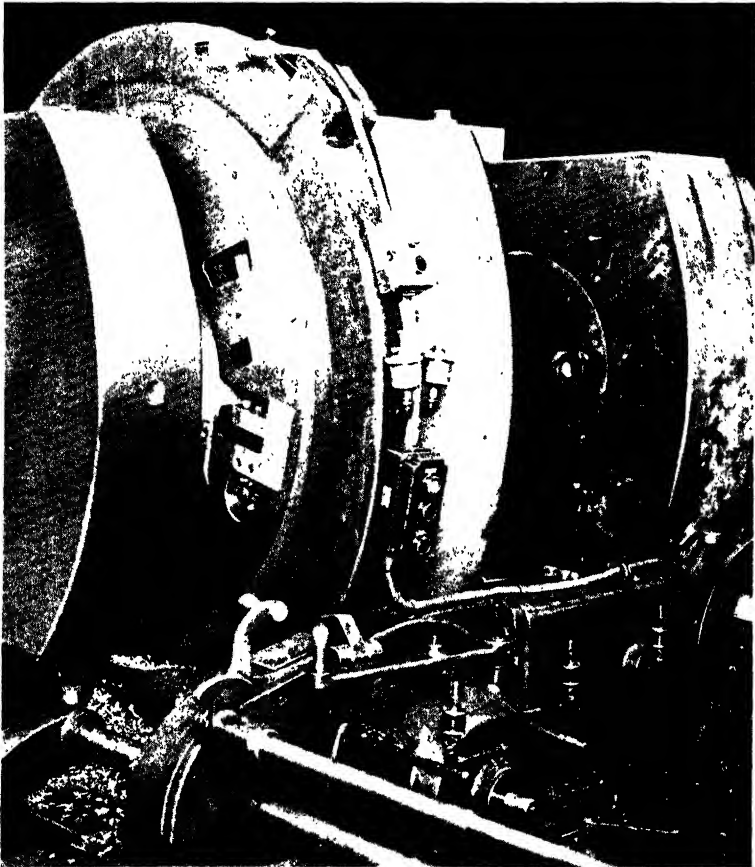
Close-up View of One of the Tool-heads on the Crankpin Finishing Machine, Showing Split Design which Enables One-half of the Tool-head to be Swung upward for Loading and Unloading the Work
